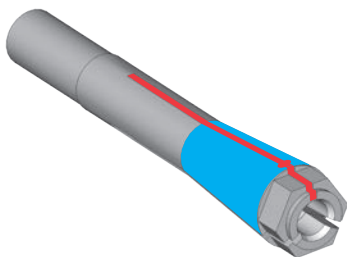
GREASING THE COLLET CHUCK; SURFACE TO GREASE MARKED BLUE; SLOT THAT MAY NOT BE GREASED MARKED RED
